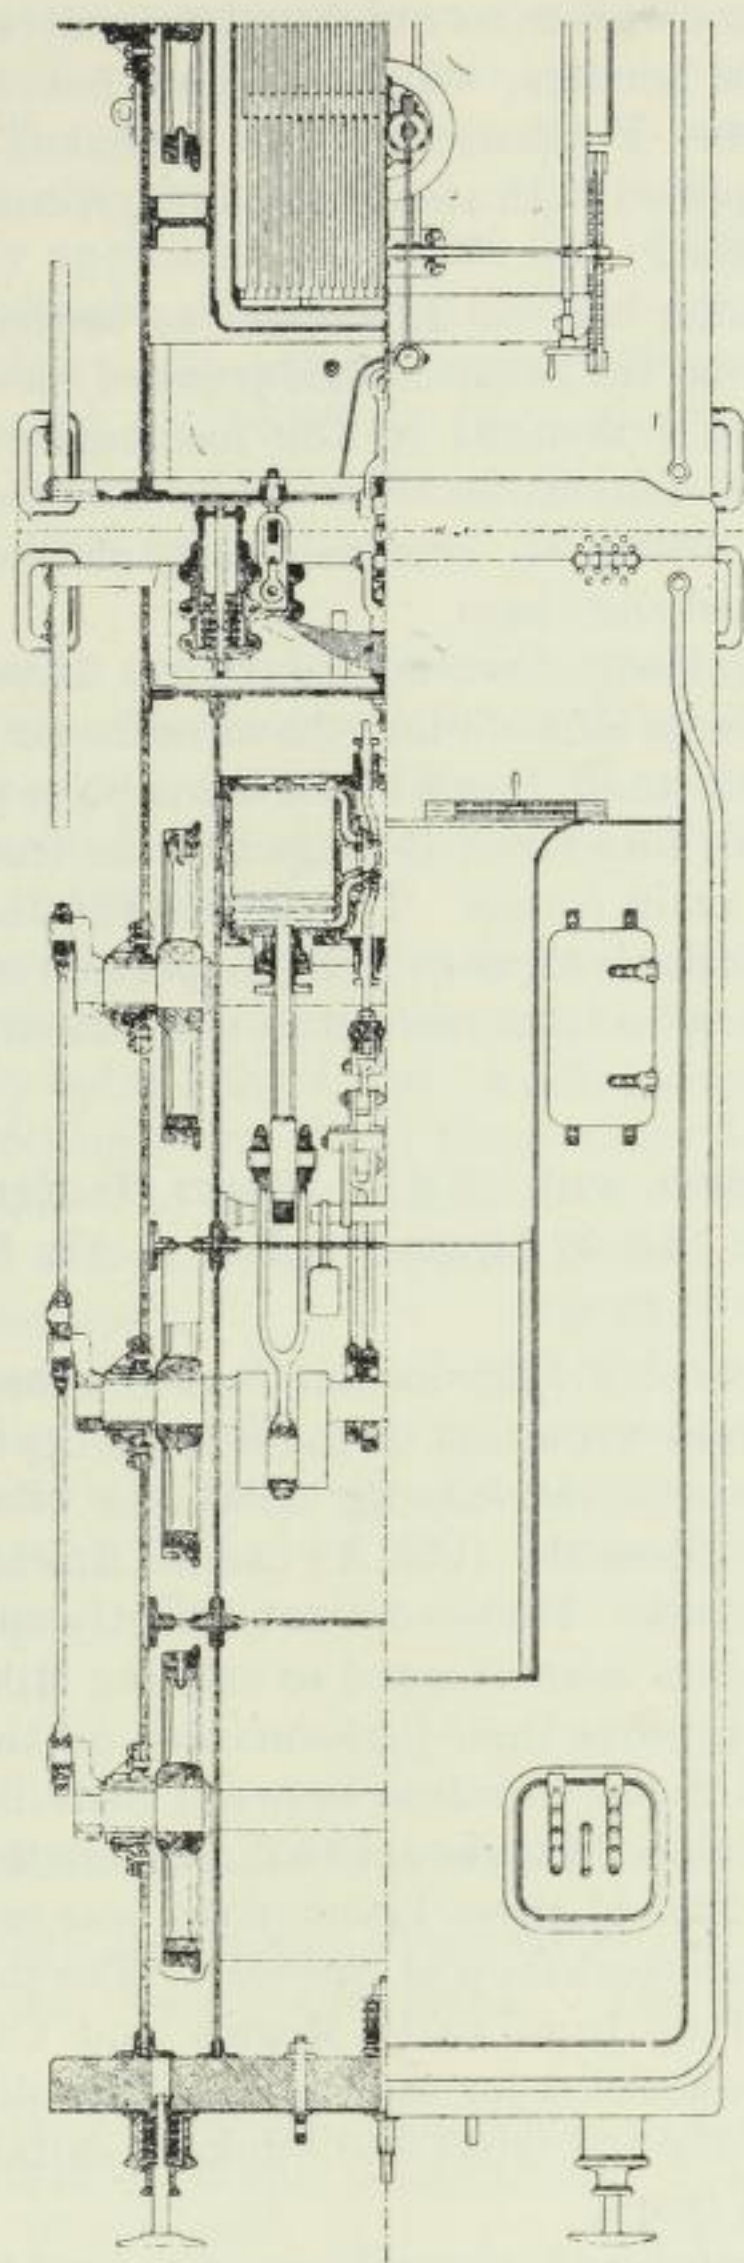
Horizontal Section, Steam Tender of the Chemin de fer du Grand-Luxembourg.
